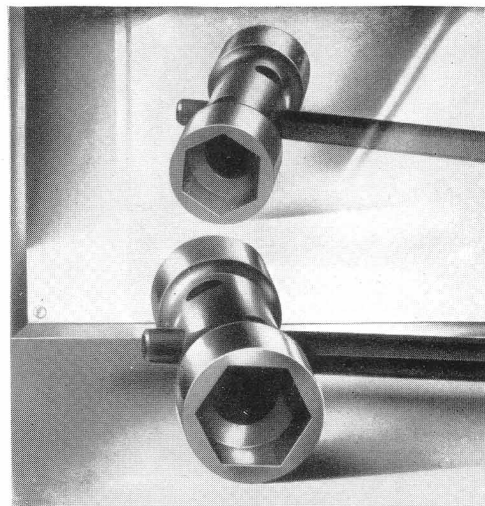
"MeLeSco" Ball Joint connection of Element to Header.
